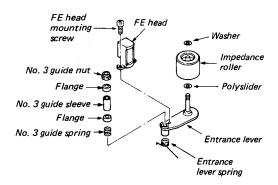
Replacement of No. 3 quide and FE head
